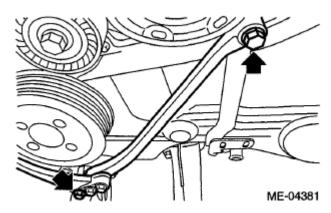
Locating Bolt And Engine Mounting Nut Courtesy of SUBARU OF AMERICA, INC.
